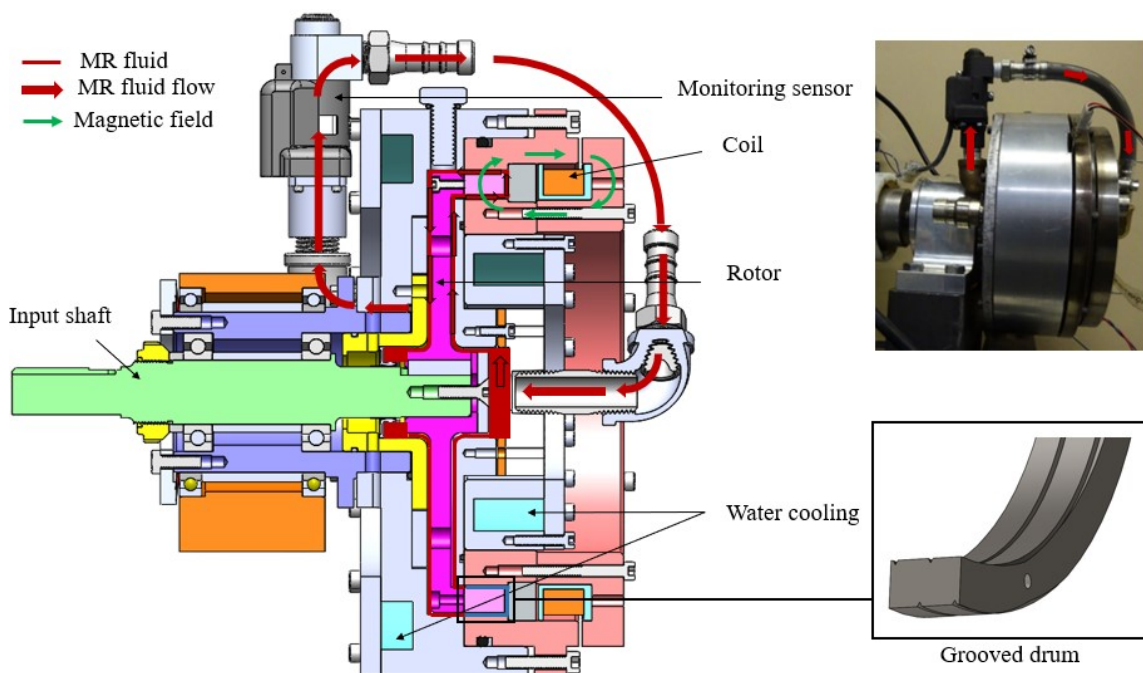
Sectional view and picture of the durability test clutch [30]. The recirculation hose is not represented in the sectional view (see picture)
